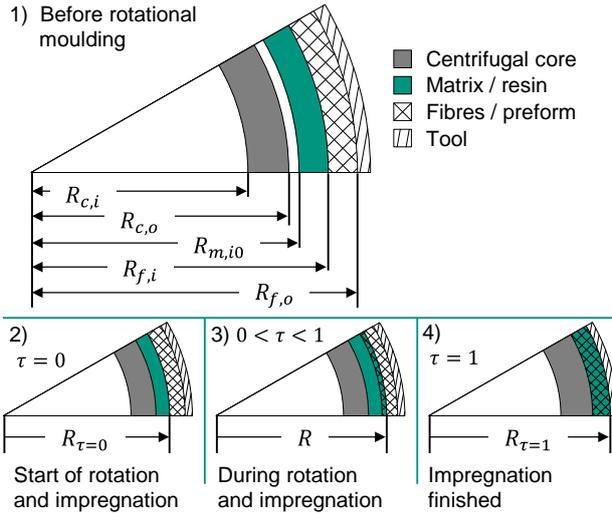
Pressure and impregnation model for a cylindrical tube rotationally molded with a core.
